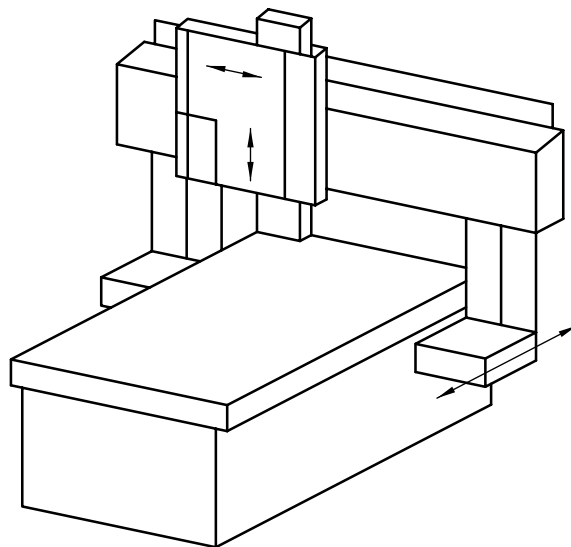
Example of portal frame machine with fixed table, moving portal, moving machining head
